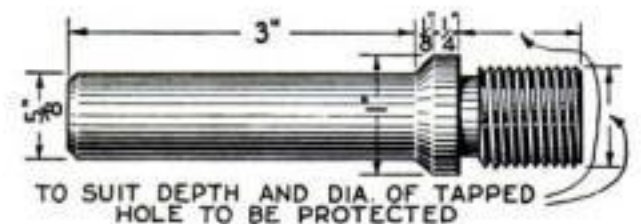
A plug for protecting the screw thread in the spindle hole of a small lathe chuck. It also makes a convenient handle.
